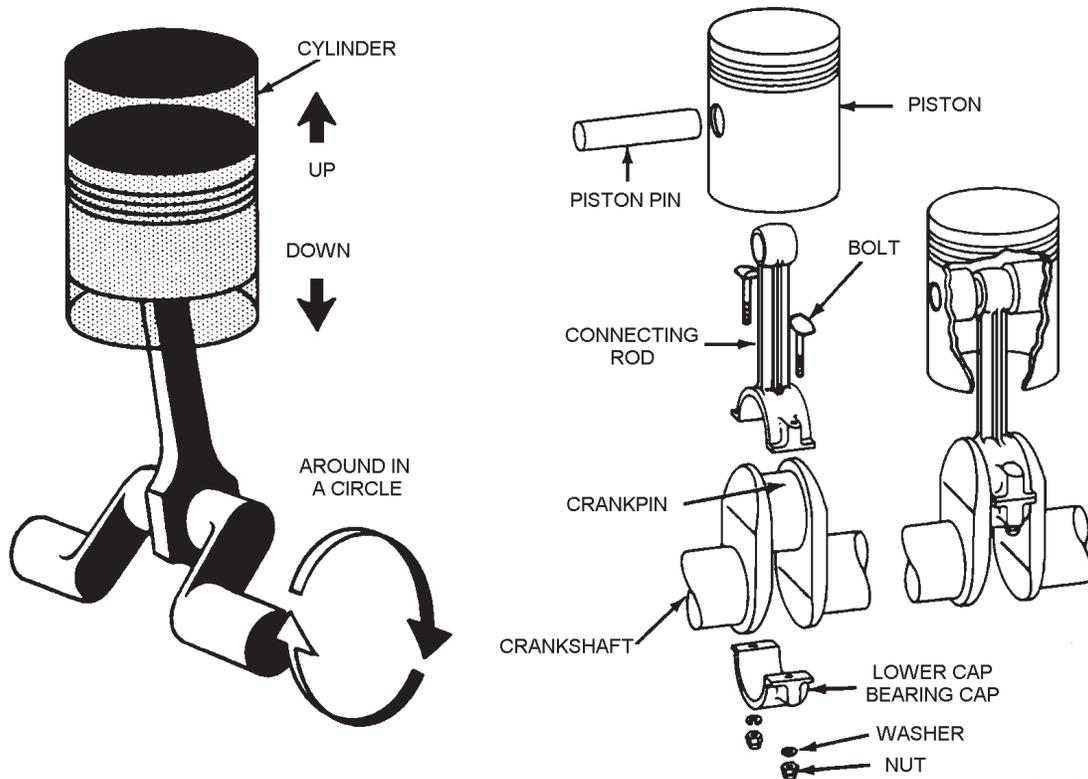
Cylinder, piston, connecting rod, and crankshaft for a 1-cylinder engine.
